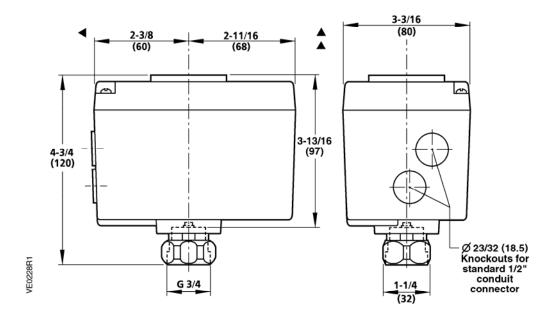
Dimensions of the SQS85.53U Actuator. Dimensions shown in Inches (Millimeters).
